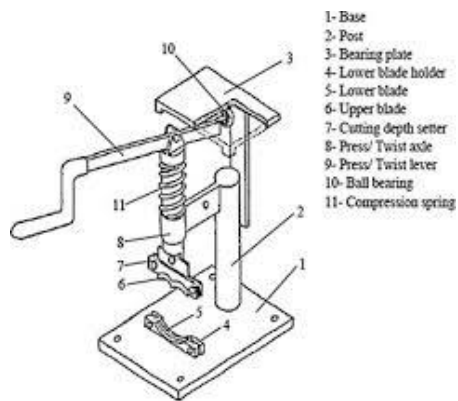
CASHEW NUT SHELL-BREAKING MACHINE PROTOTYPE
